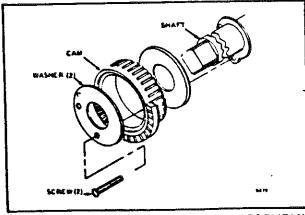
EXPLODED VIEW OF THE CAM ASSEMBLY.
